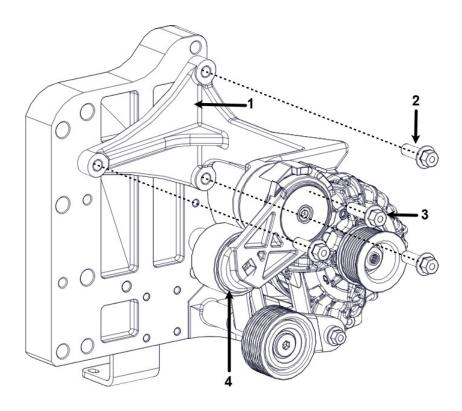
Left-Hand Automatic Belt Tensioner Assembly
